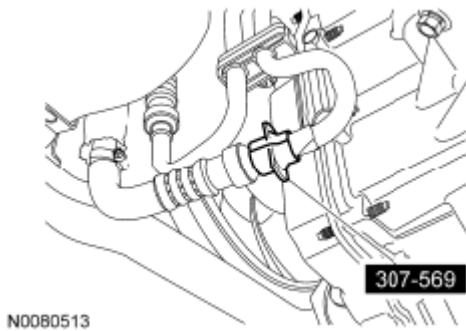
Identifying Transmission Cooler Line Disconnect Tool
